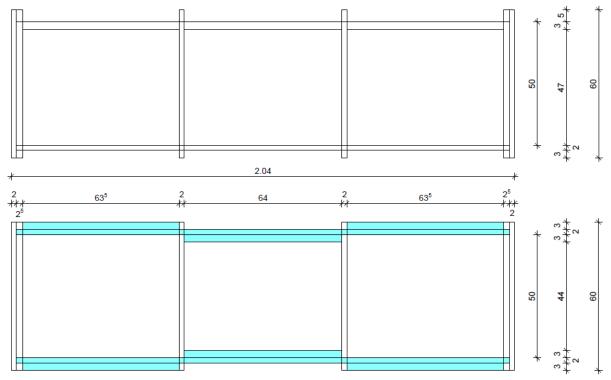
Schematic of the water tank used for testing. Top: plan. Bottom: side elevation without frame.
